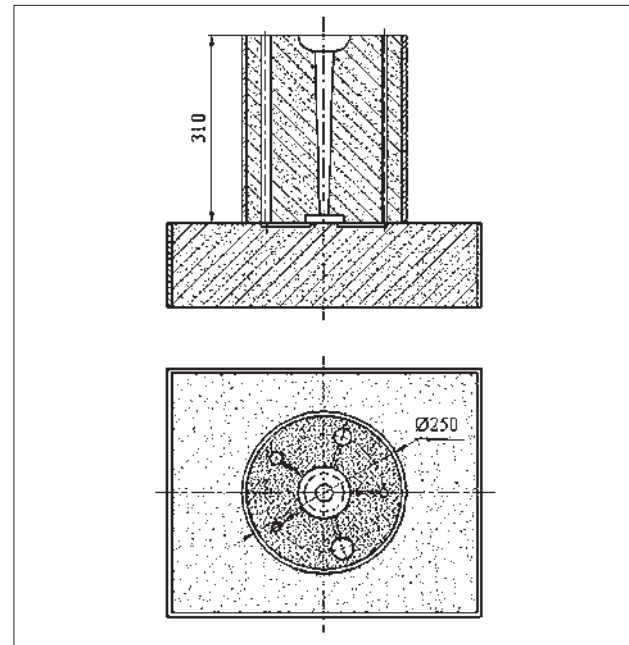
Mould used for casting specimens (dimensions in millimetres)
